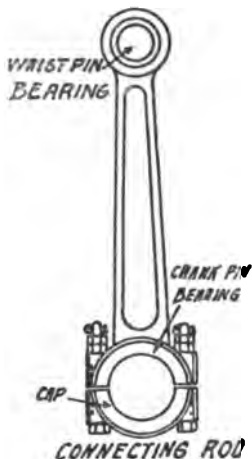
A connecting rod showing wrist pin bearing and crank pin bearing and cap.
